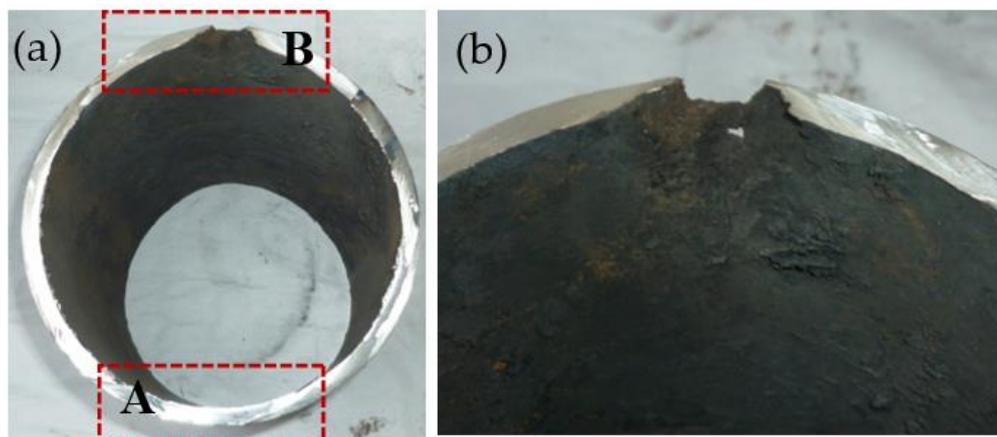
(a) Cross-section of the damaged tube that cutaway through one of the leakage holes, showing two areas A and B for specimen preparation, (b) Close-up view of the damaged tube around the leakage hole at area B shown in Fig. 2(a)
